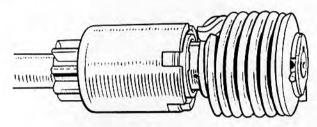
ECLIPSE PATTERN STARTER DRIVE
